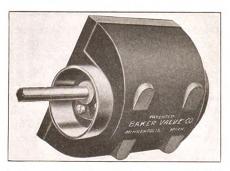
BACK OF CAGE, SHOWING LUGS WHICH AID IN HOLDING VALVE IN PLACE
